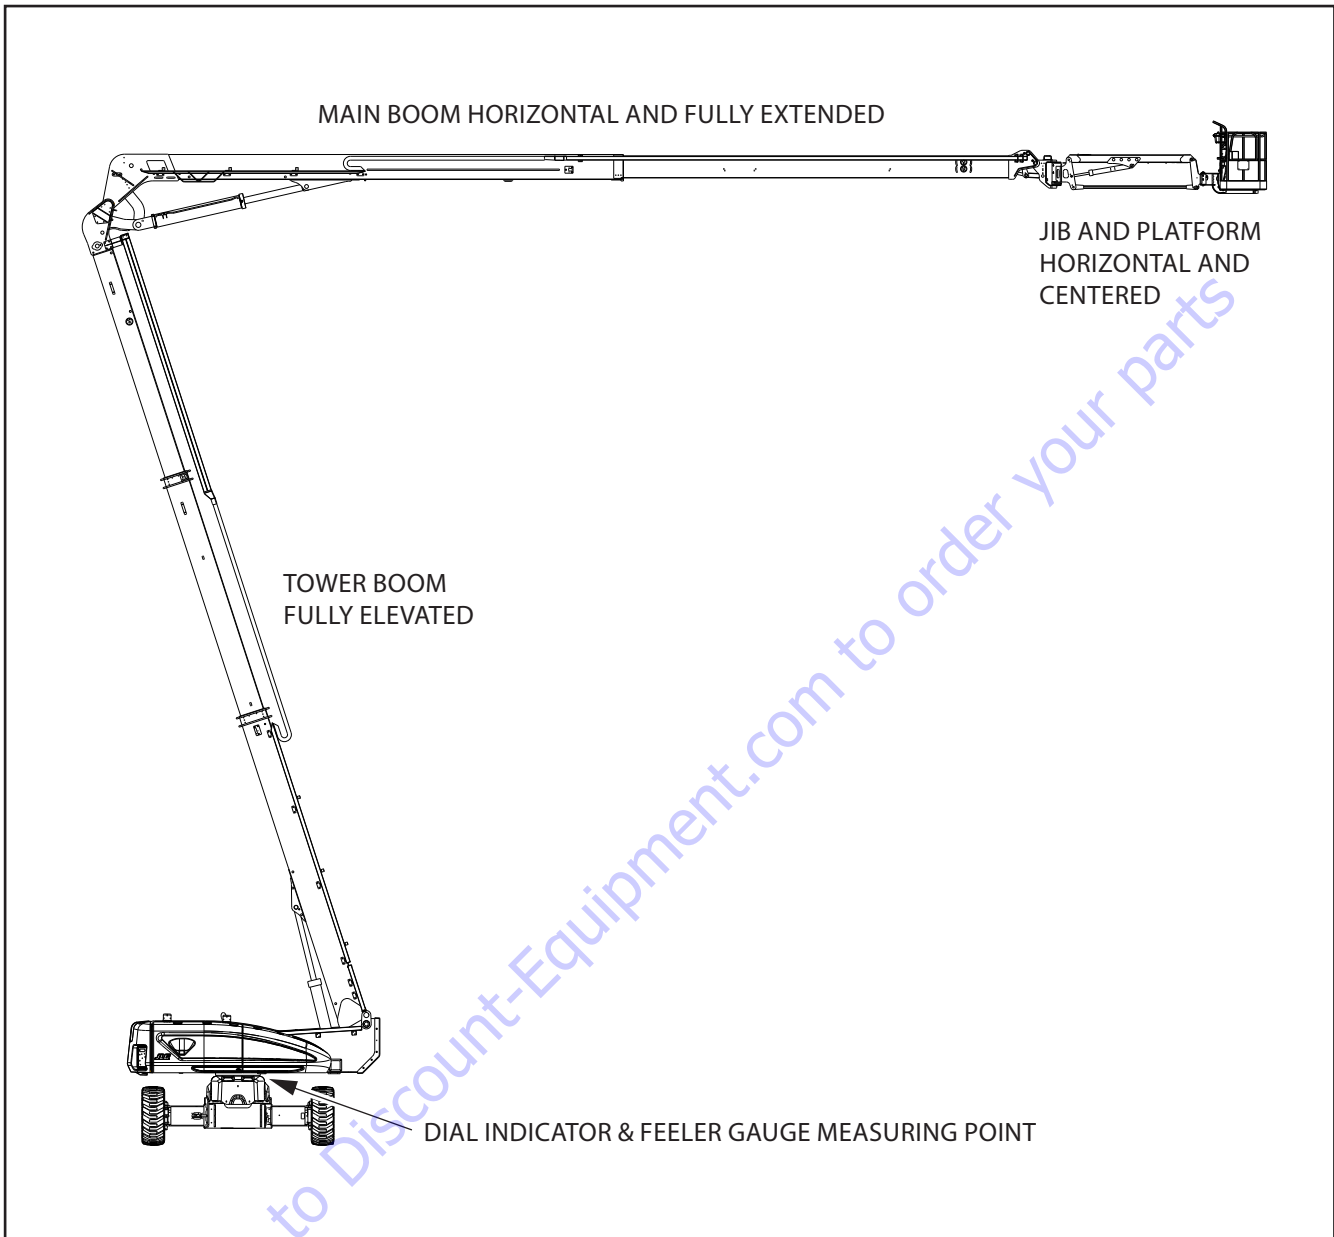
Turntable Bearing Service Boom Placement - 3
